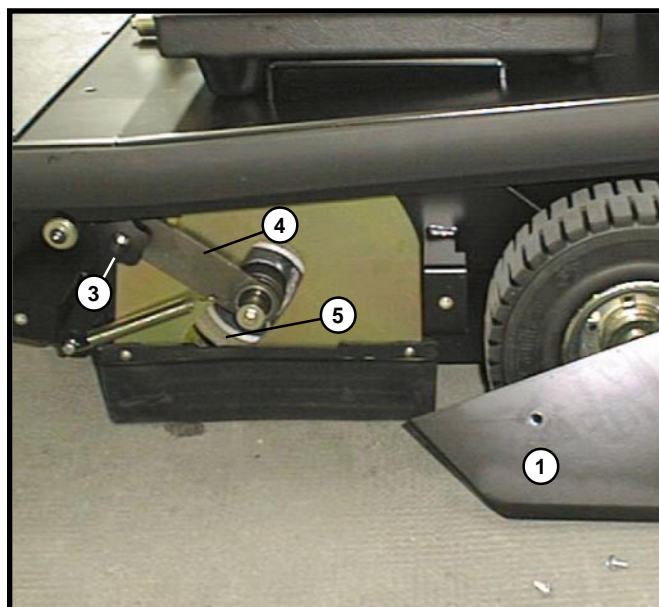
A DETAIL OF BRUSH SHOWING ASSEMBLY DIRECTION
